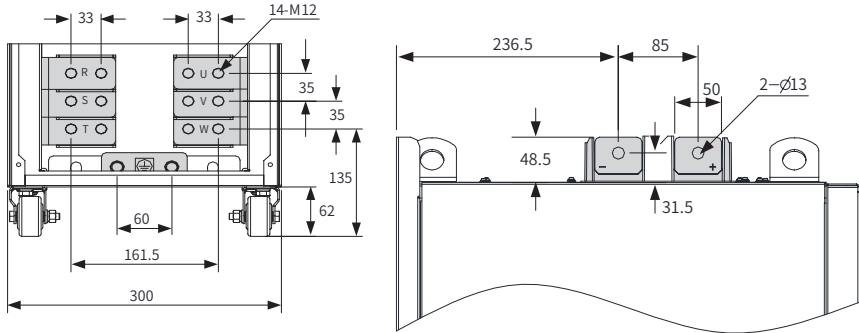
Main circuit terminal dimensions of MD880-01S-0441-4/MD880-01S-0481-4 (without side entry copper busbar and output reactors)
